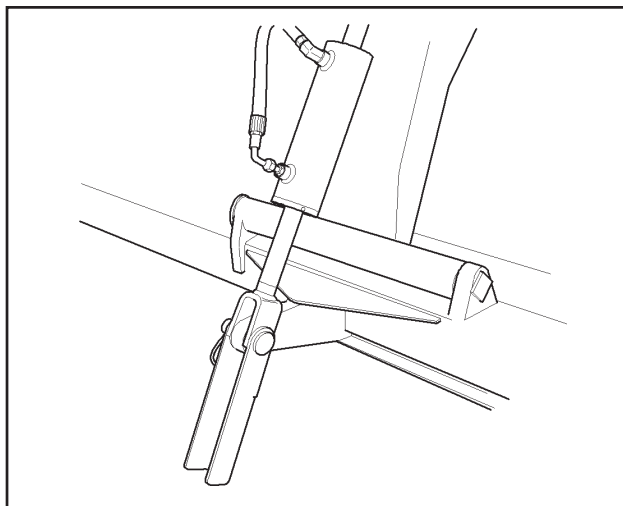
MECHANICAL BRUSH LIFT CYLINDER LOCK - OPEN
